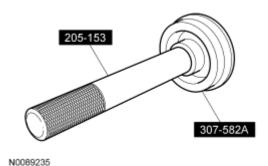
Axle Seal Installer & Handle Courtesy of FORD MOTOR CO.
